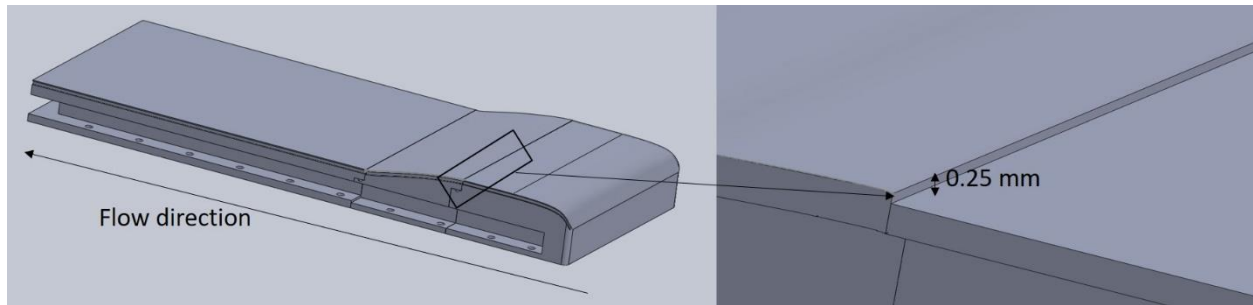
Assembly of experimental pieces (left). (Right) shows the bump to trip separation in the test article.
